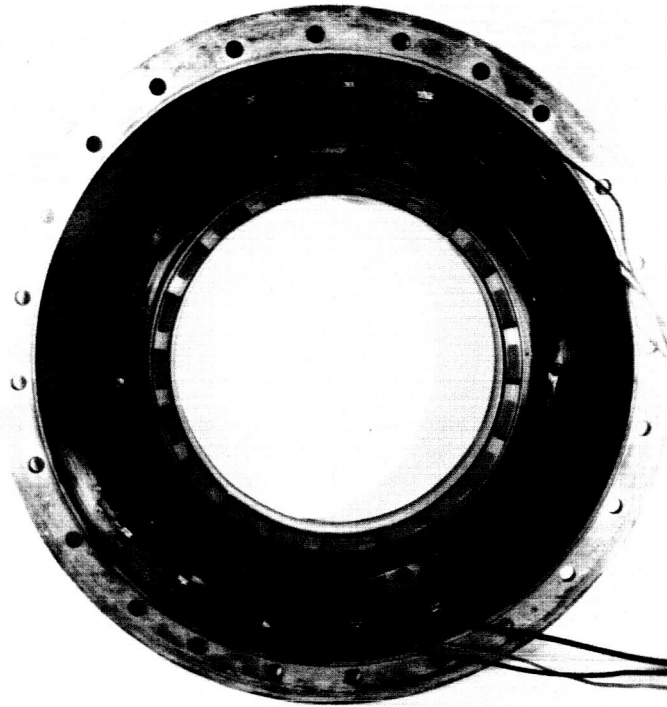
Seal Assembly After 79 Hours of Elevated Temperature Endurance Testing
